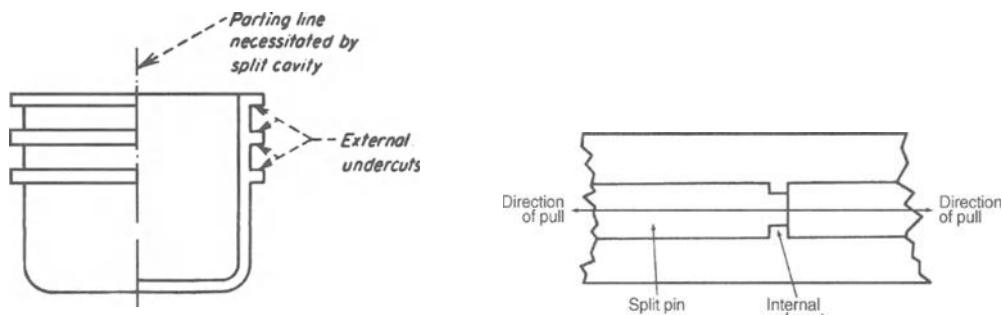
External undercuts with this split-mold design eliminate the undercut problem but the part develops a parting line.
